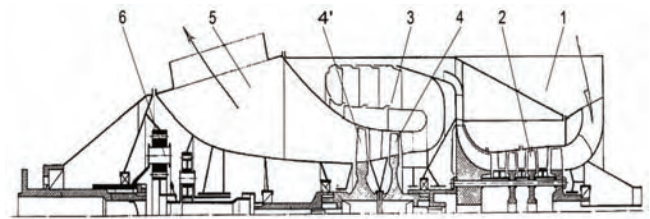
Design scheme of PT6 turboprop engine: 1 – air inlet, 2 – compressor, 3 – combustor chamber, 4 – compressor powered turbine, 4' – power turbine 5 – exhaust, 6 – reduction gearbox
